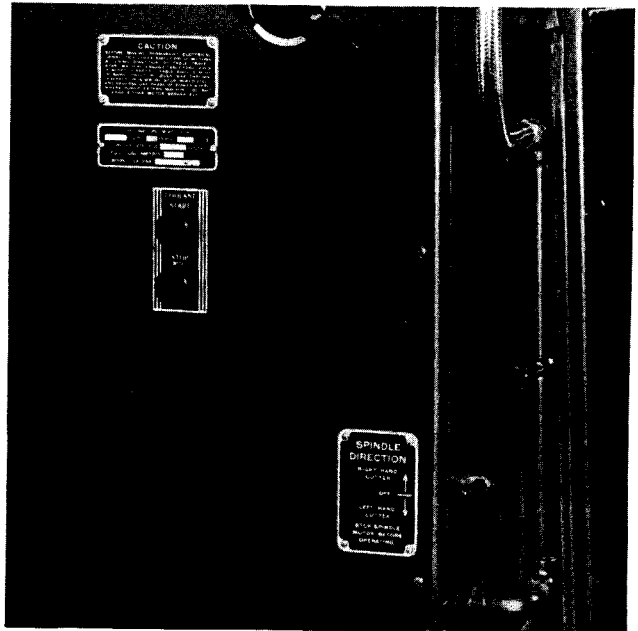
Spindle reversing switch and coolant start-stop push buttons.
